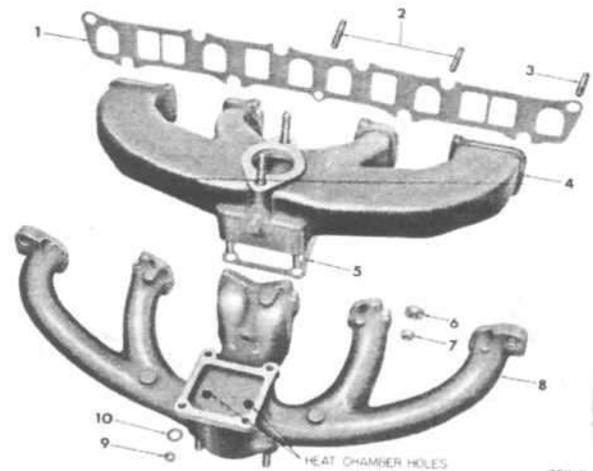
MODEL L6-226 INTAKE AND EXHAUST MANIFOLD (Single-throat Carburetor)
